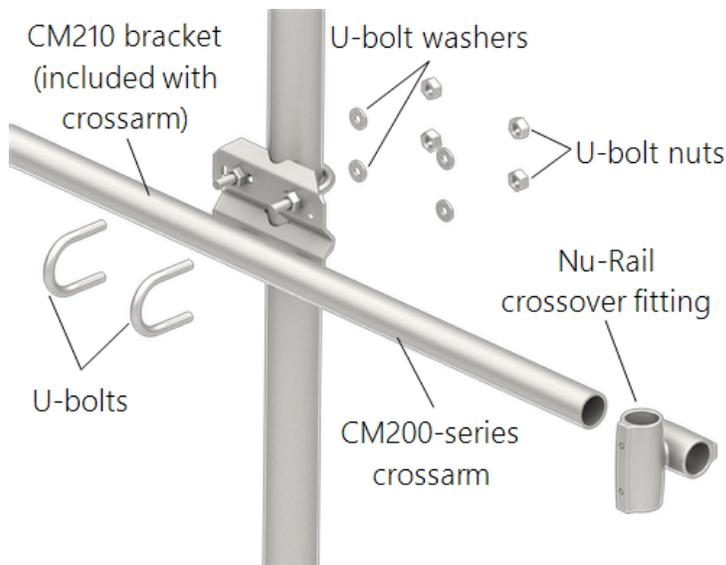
Crossarm and Nu-Rail crossover fitting mounted to mast (exploded view)
